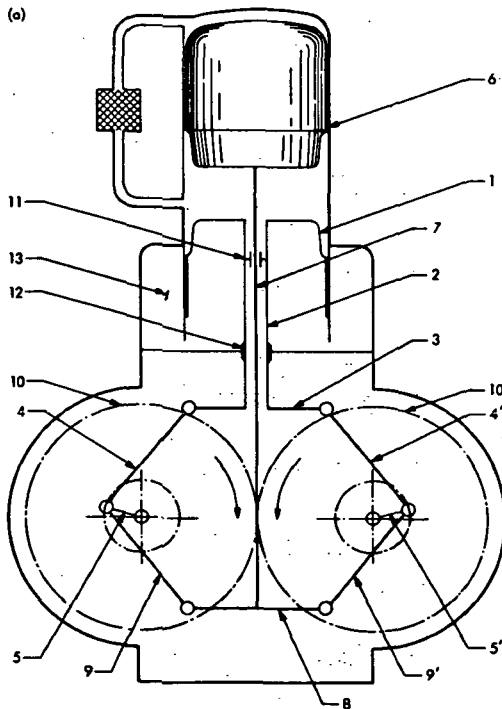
(a) Schematic diagram of rhombic drive mechanism (Ref. 6-8). 1 = power piston. 6 = displacer piston. 5-5' = cranks in two shafts rotating in opposite senses and coupled by gears 10 - 10'. 4-4' = con-rods pivoted from ends of yoke 3 fixed to the hollow power-piston rod 2. 9-9' = con-rods pivoted from ends of yoke 8 fixed to displacer-piston rod, which runs through the hollow power-piston rod. 11 and 12 = gas-tight stuffing-boxes. 13 = buffer space containing gas at high buffer pressure
